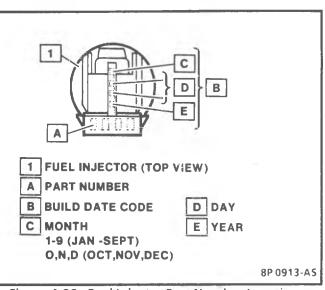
Fuel Injector Part Number Location TBI 700
